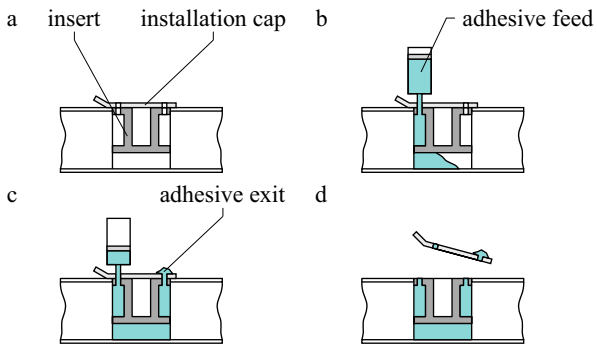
(a) Insert in hole; (b) Adhesive injection; (c) Exit of adhesive; (d) Cap removal after curing
